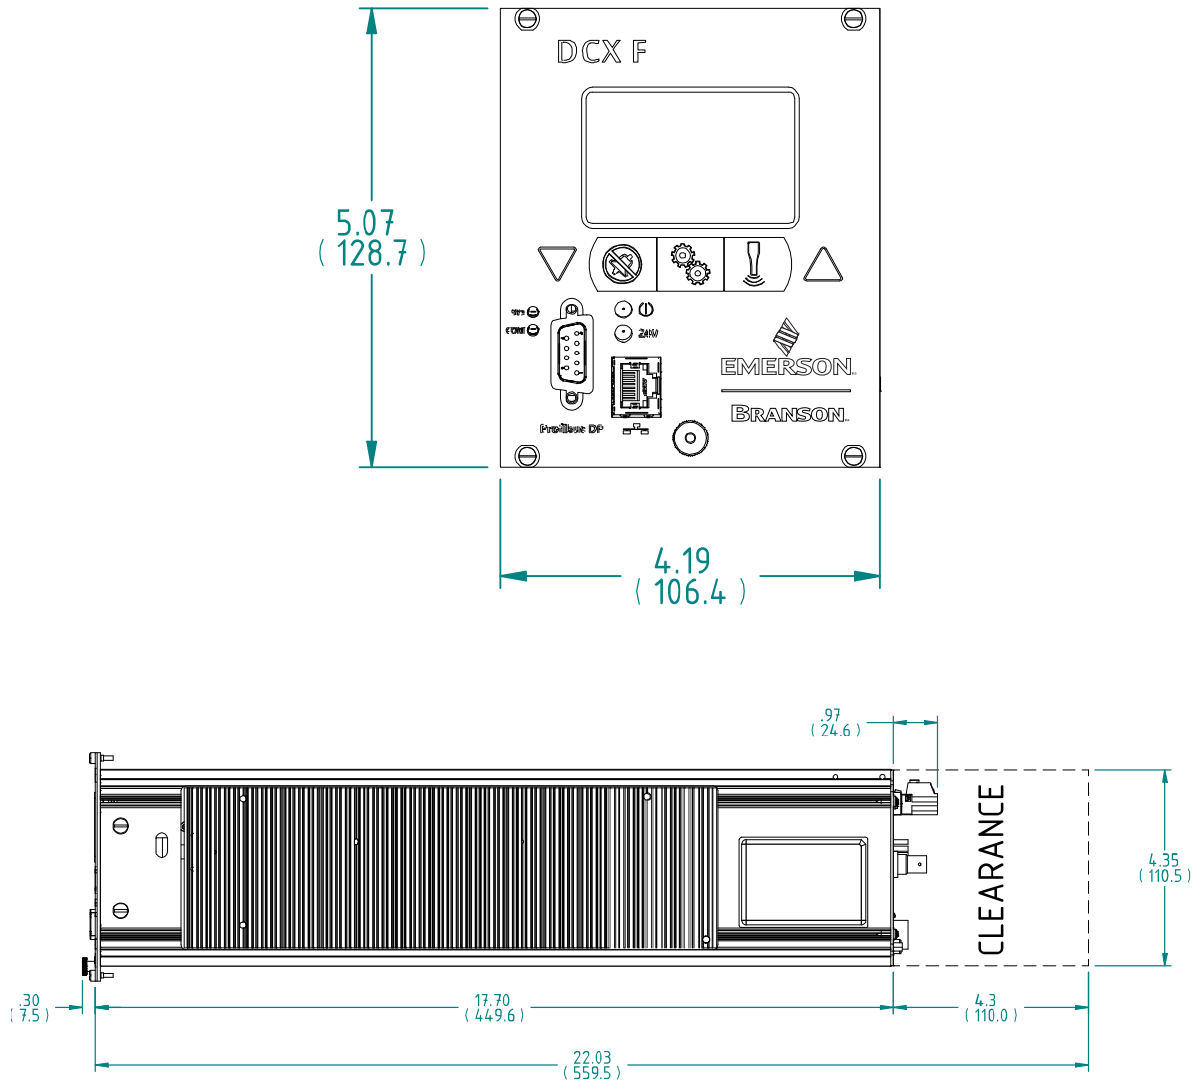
DCX F-DP Power Supply Dimensional Drawing (Medium)
